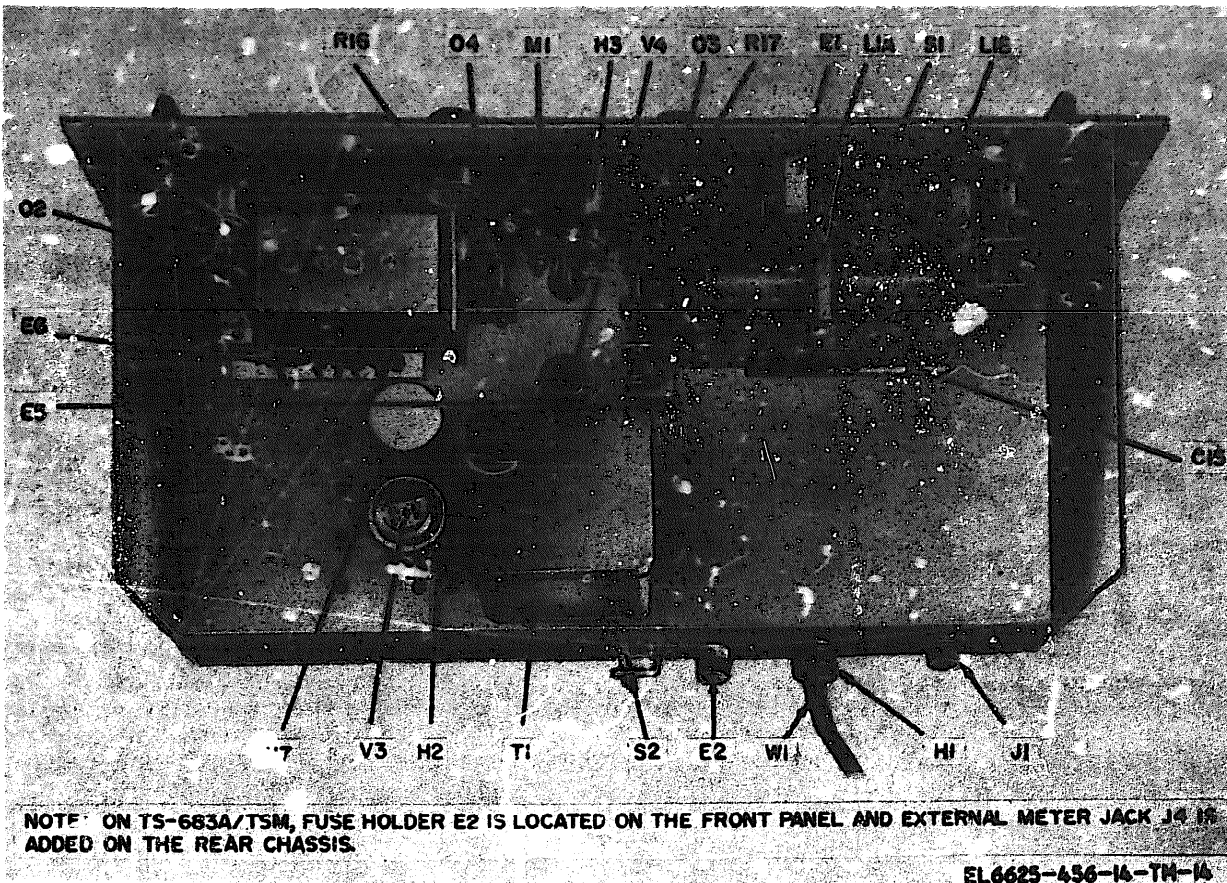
TS-683/TSM panel and chassis assembly, dust cover removed, top view.
